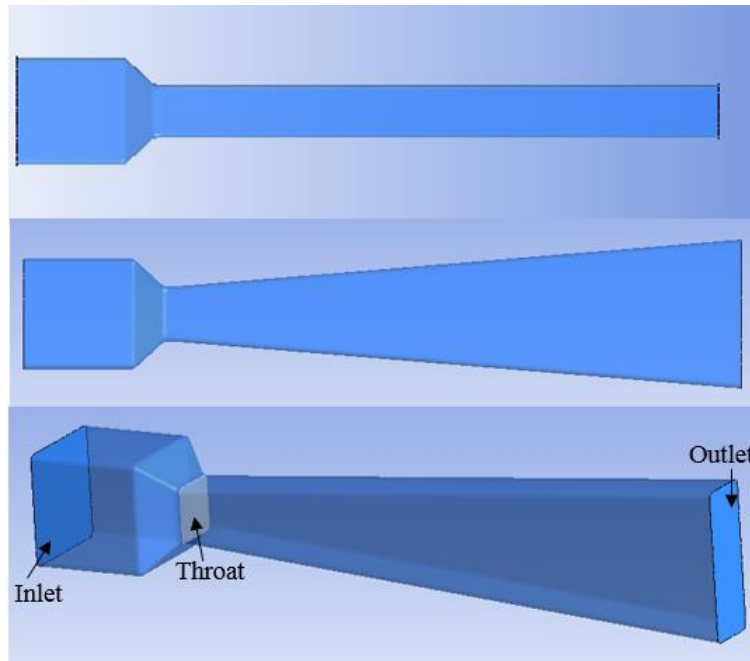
CD Nozzle Top, Side, and Isometric Views (from Top to Bottom)
